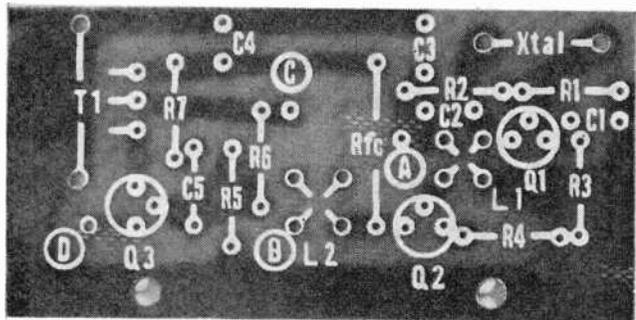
Component side of board showing parts location and points at which to attach leads.
